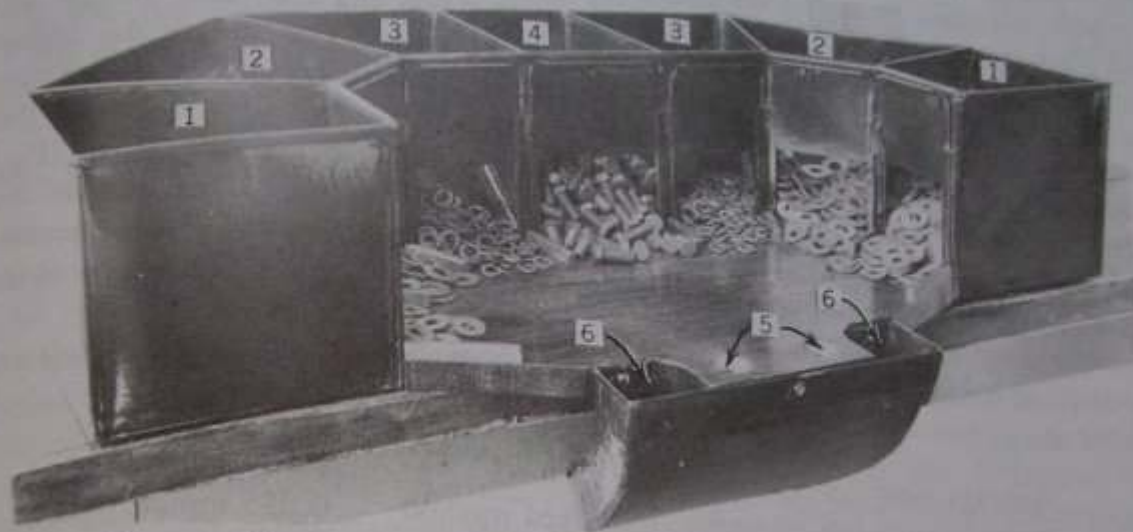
Bins, fixture, and chute for bolt and washer assembly.
